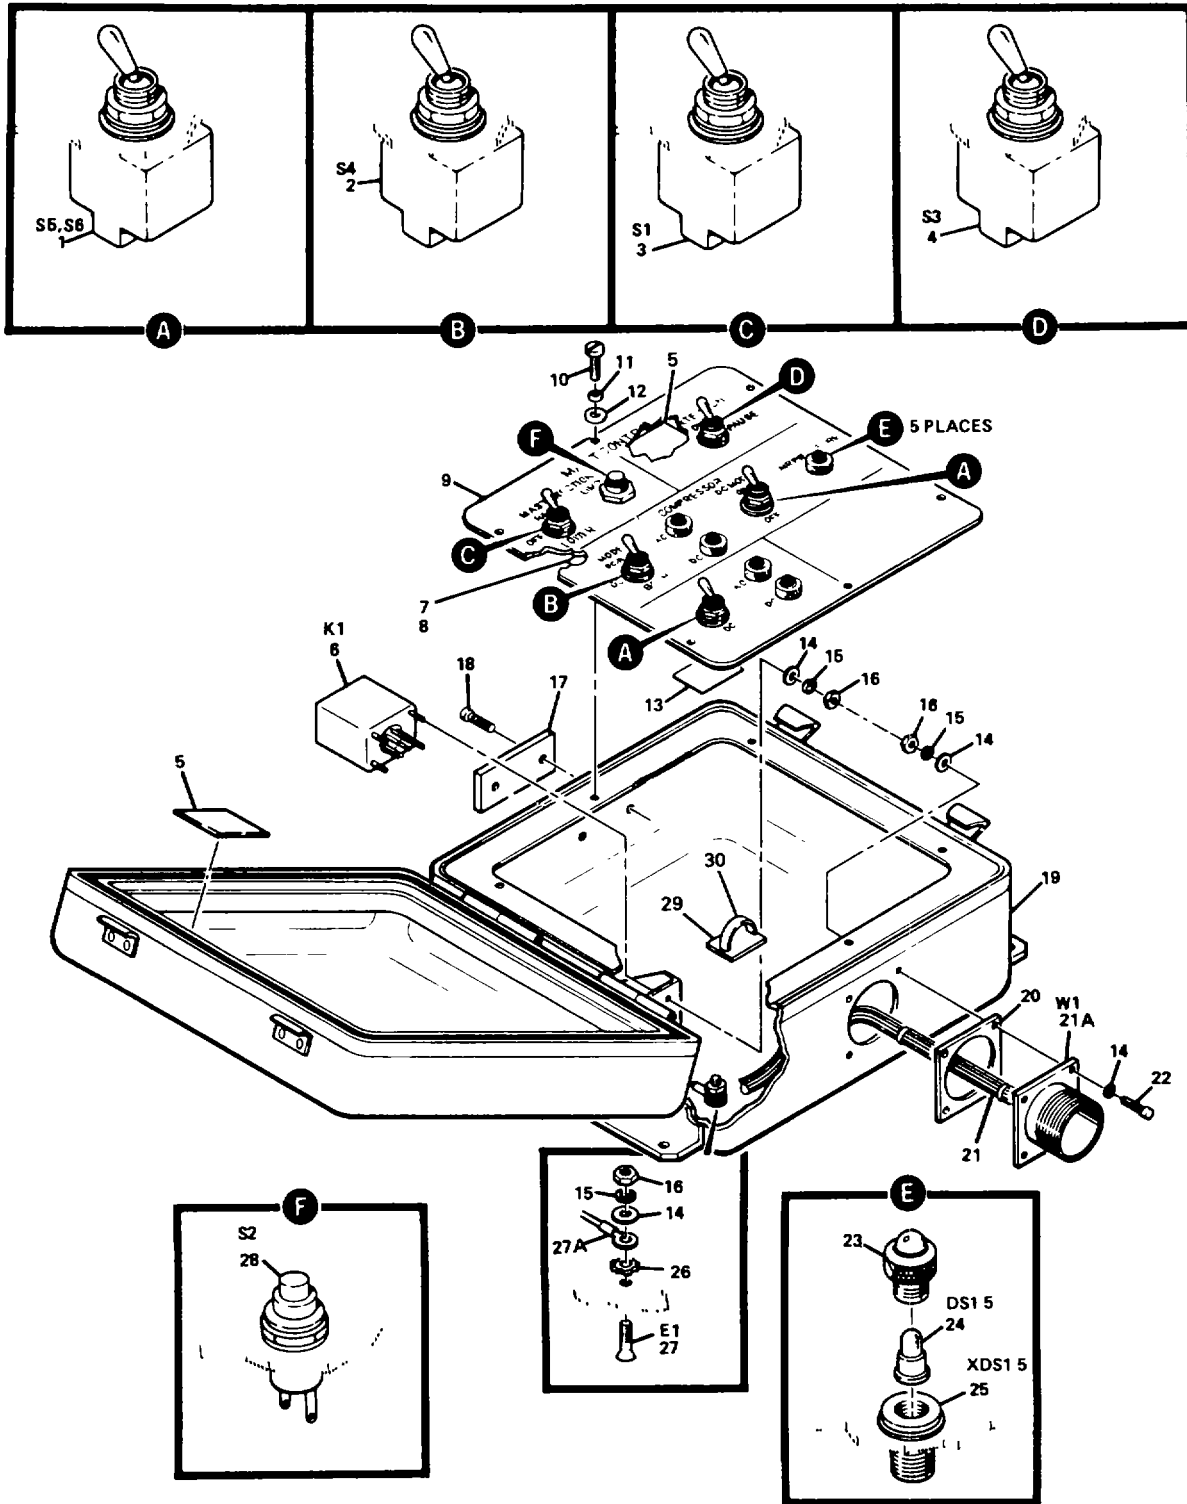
Hydraulic Component Assembly MX-10213/G (Sheet 3 of 3)
